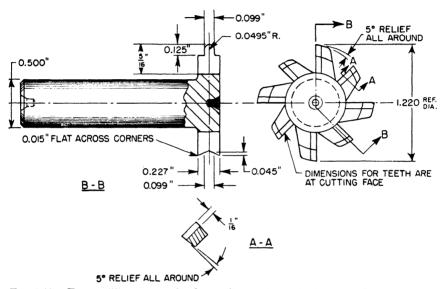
Form-milling cutter for brass die castings. This cutter is operated at 4,500 rpm (1,500 sfpm). Chip load is 0.015 in. per tooth per revolution, and feed is 300 in./min.
